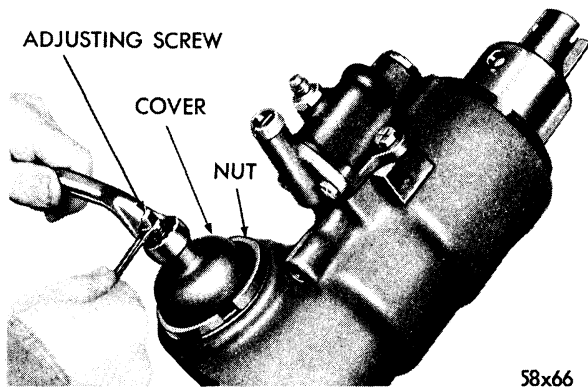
Adjusting Gear Shaft Adjusting Screw
